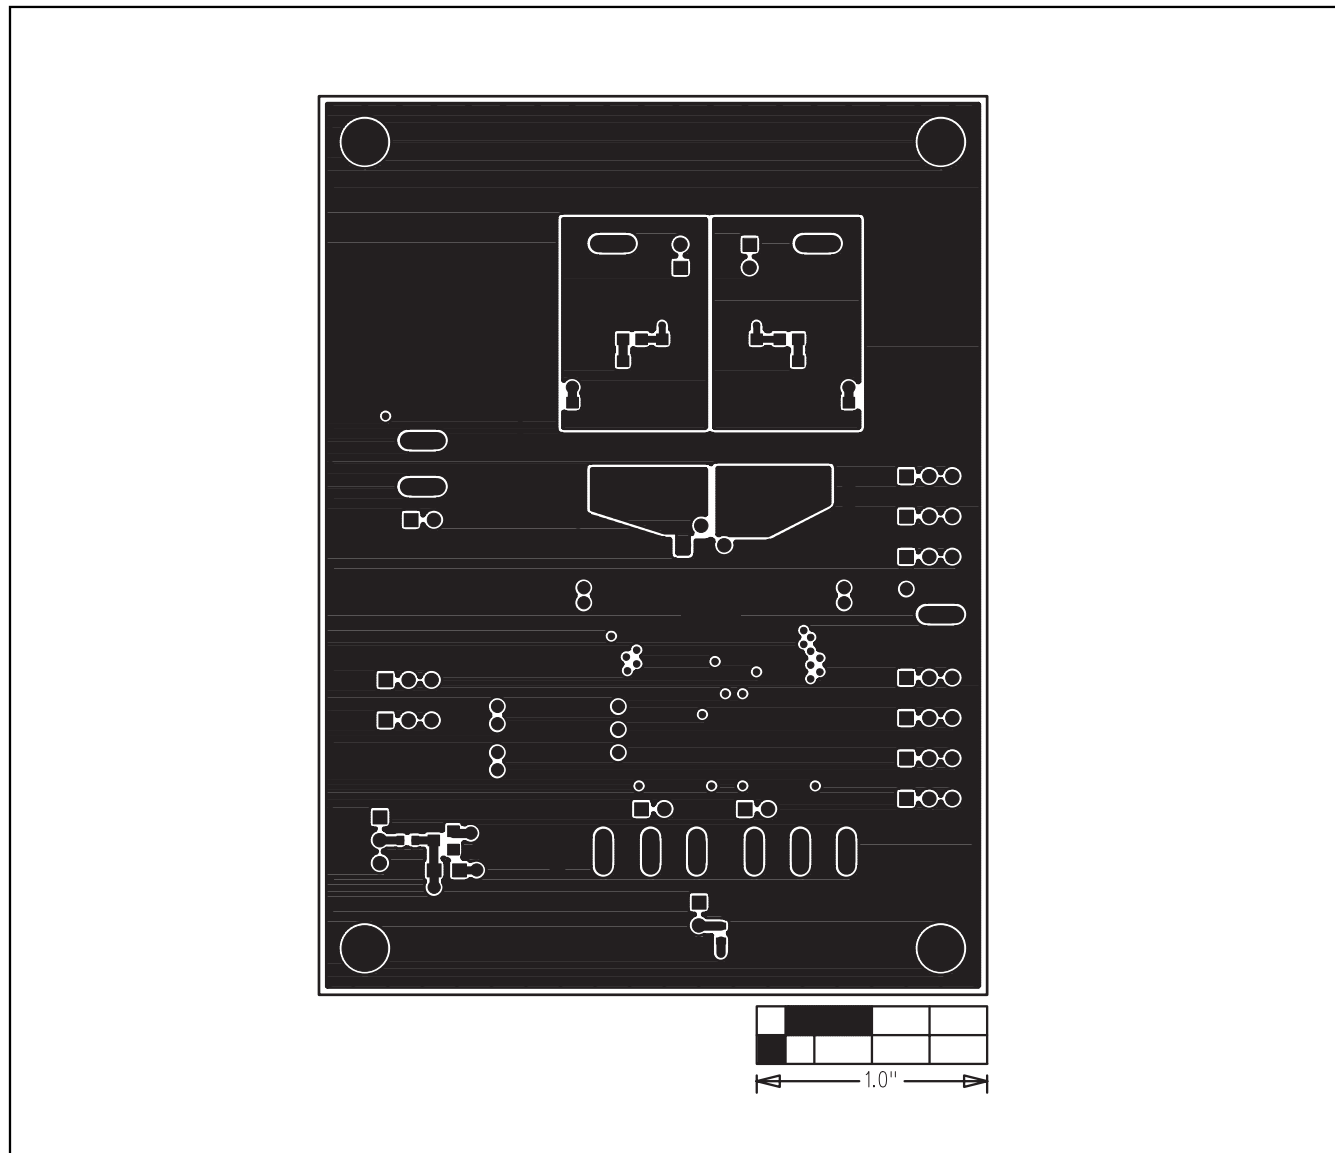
MAX9708 EV Kit PCB Layout—Solder Side
